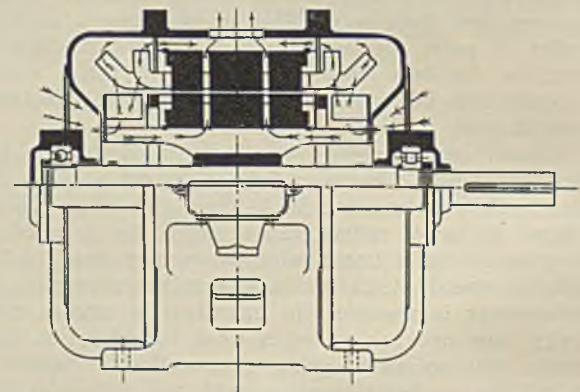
Sectional Drawing of Box Frame Protected Enclosed Motor.
